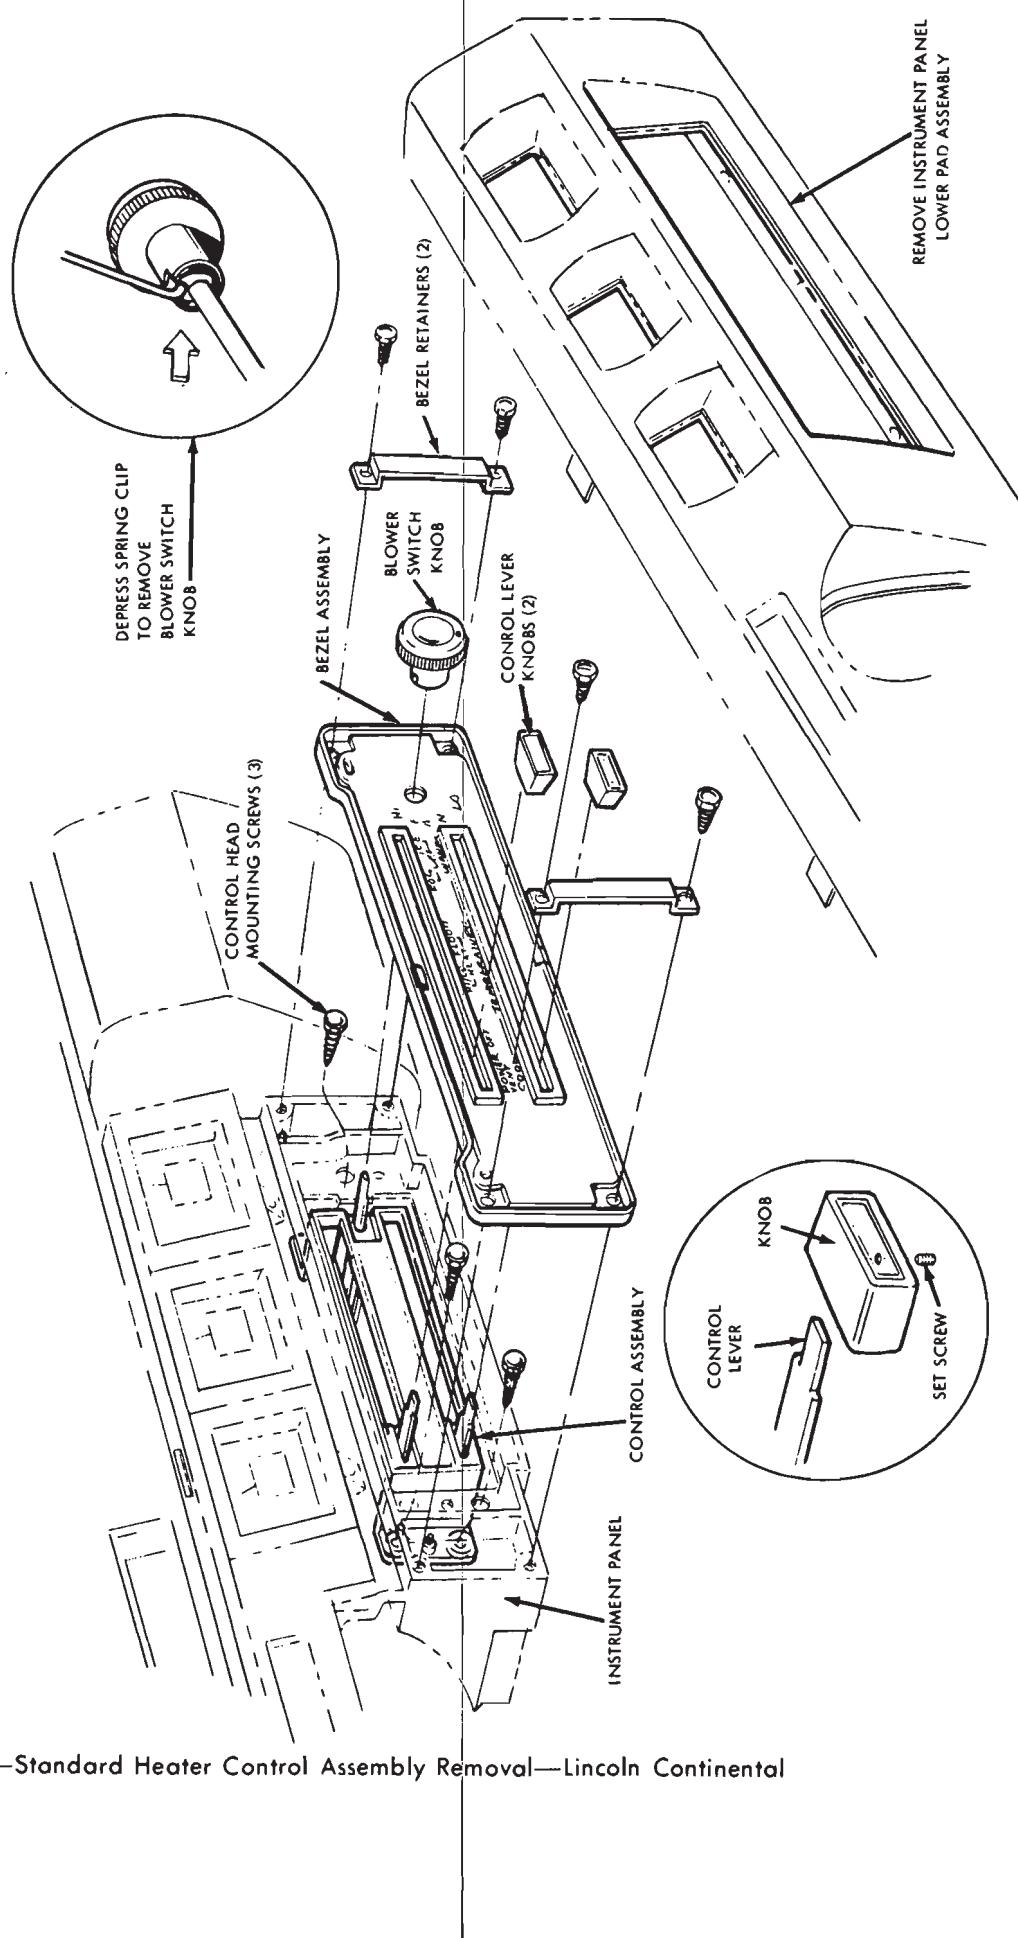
Standard Heater Control Assembly Removal—Lincoln Continental
